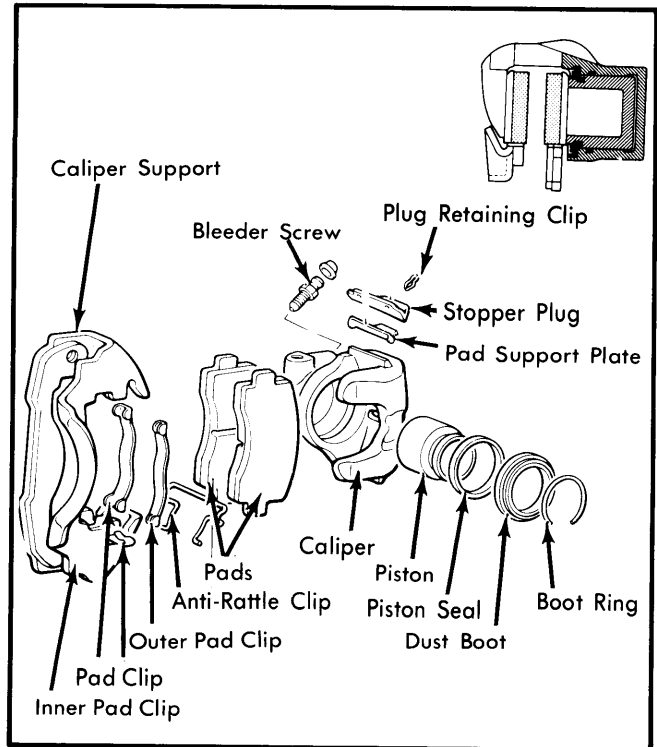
Exploded View of Front Disc Brake Caliper (Challenger, Sapporo, Colt Sta. Wgn. & Pickups)
